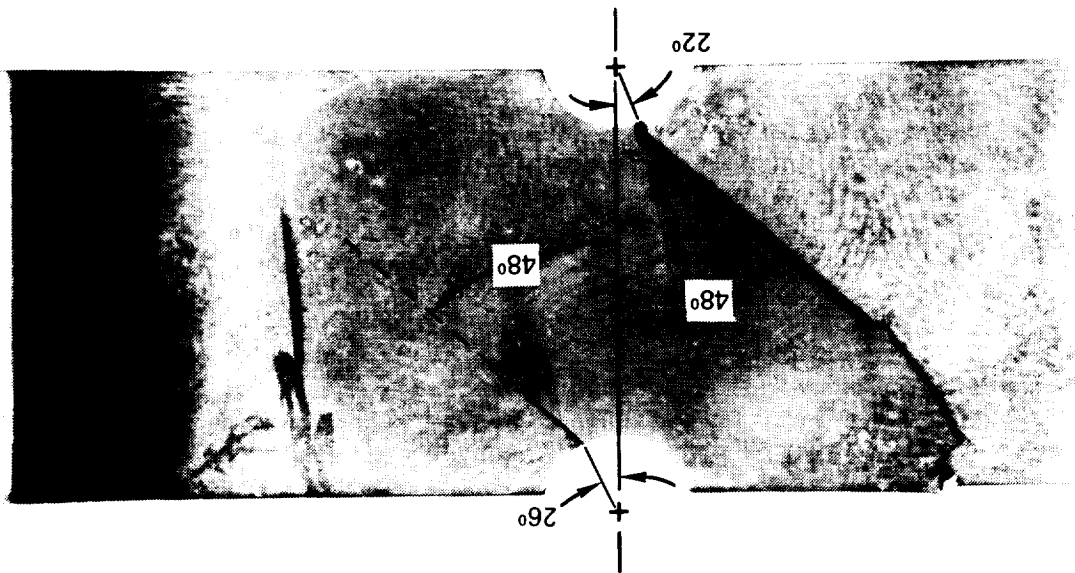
FATIGUE CRACKS IN <001><100> MILD NOTCHED SPECIMEN
